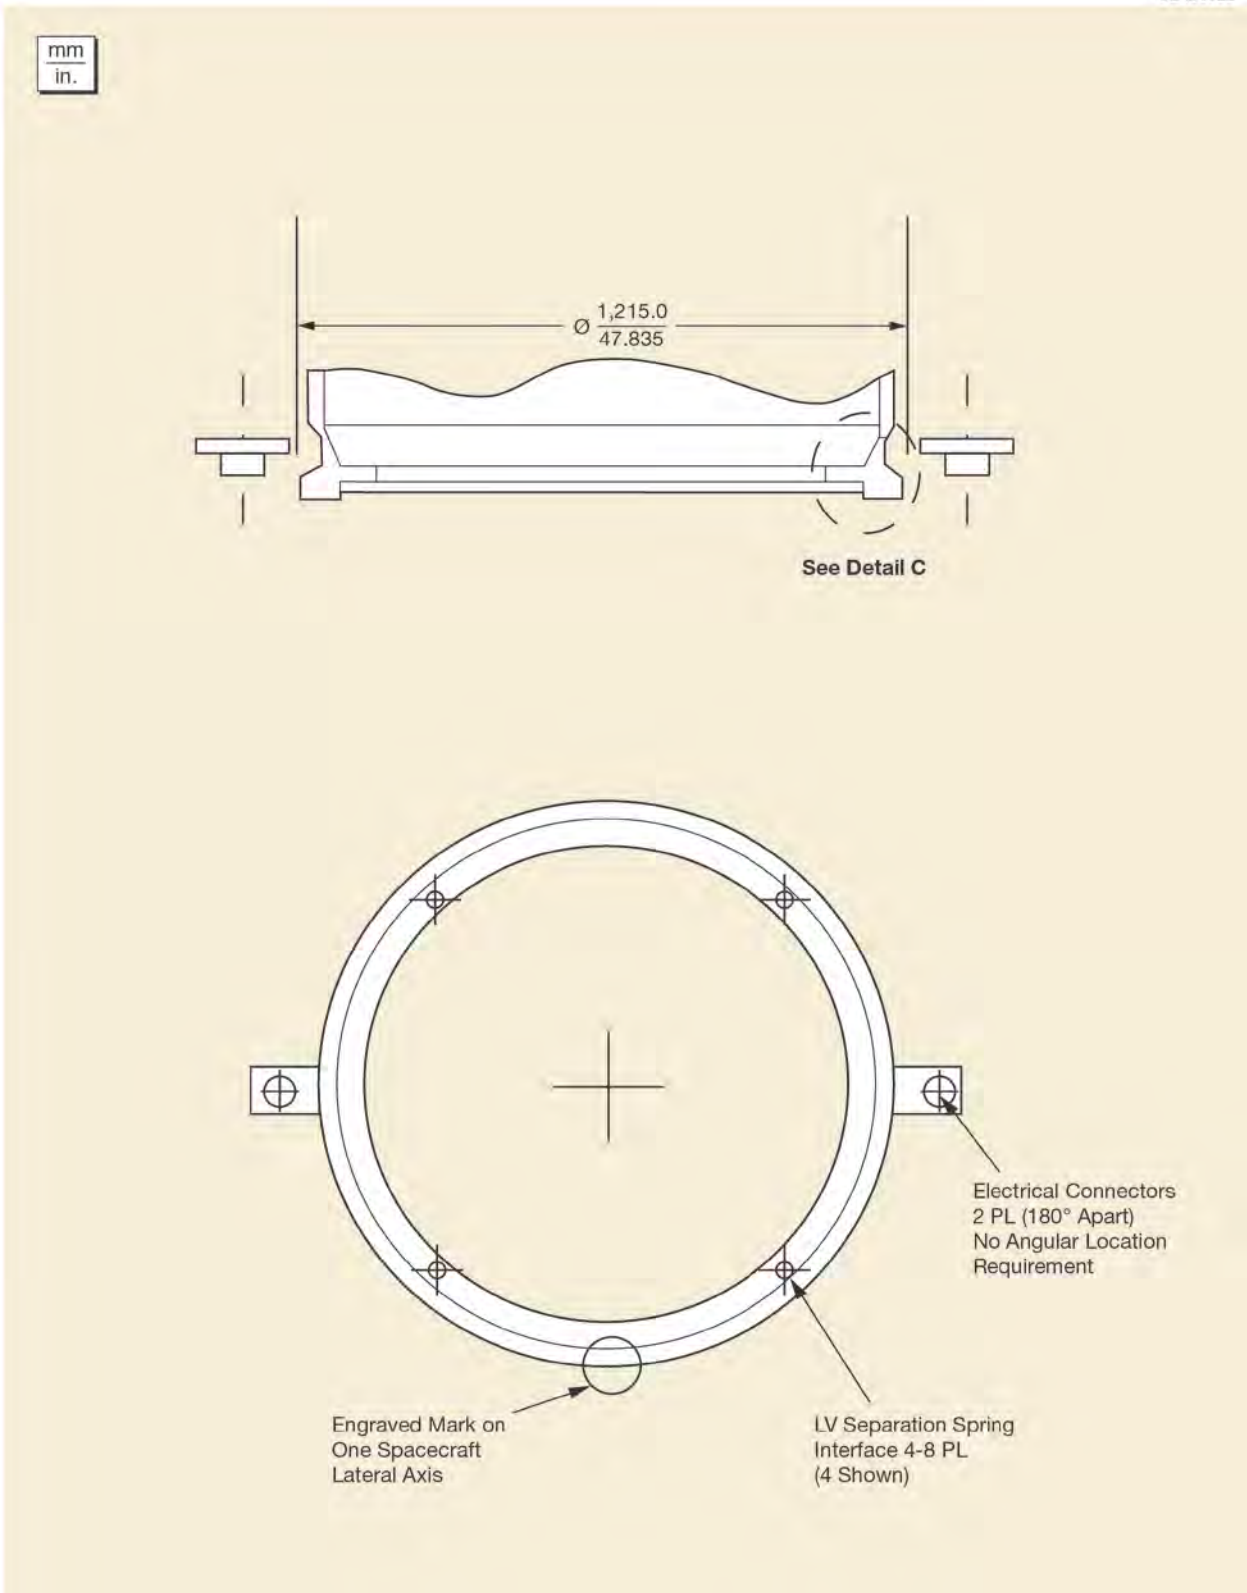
B1194 PLA Spacecraft Interface Dimensional Constraints
